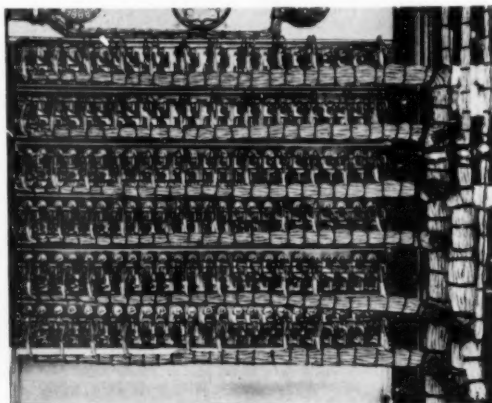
Detail of jack wiring showing laced cables, forming to jack rows, and general arrangement.
